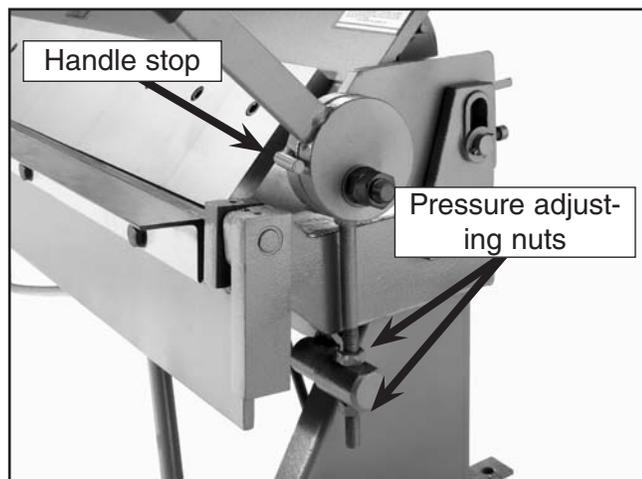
Clamping pressure adjusting nuts and handle stop (right end shown).
